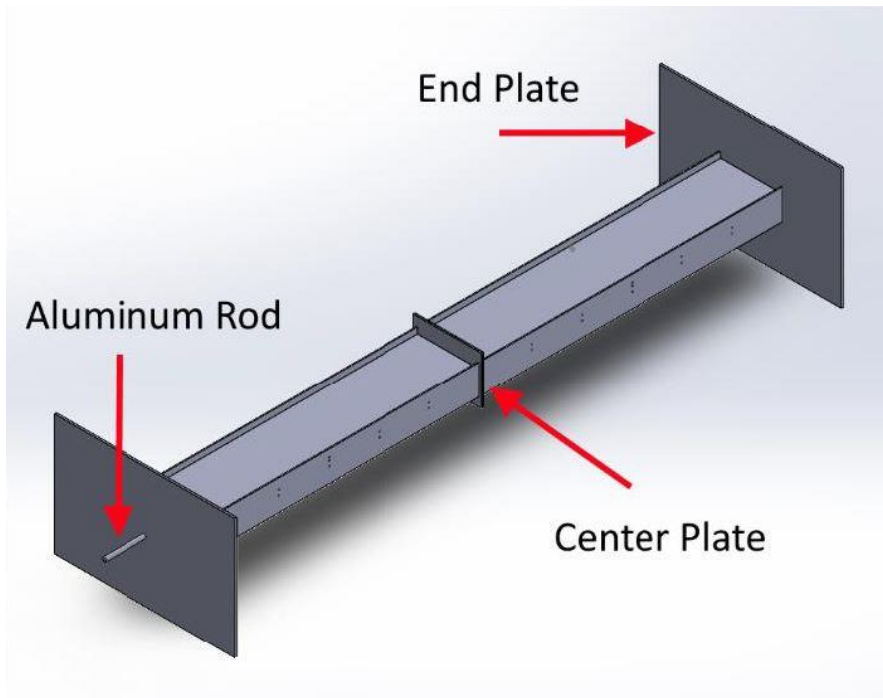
CAD drawing of 'H' section (Configuration 2) assembly
